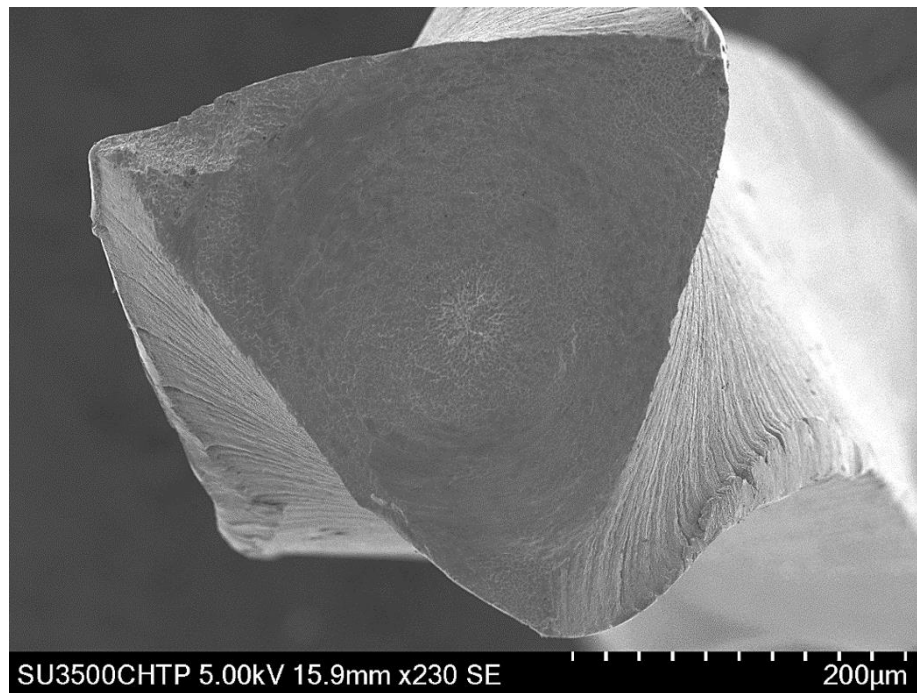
Fractured surface of a HyFlex CM file after 50% fatigue preloading and failure by shear stress.
